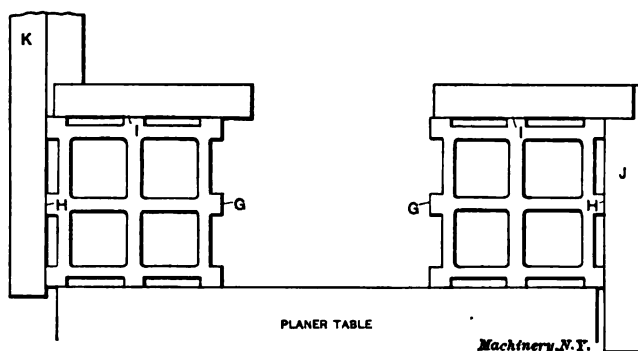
Method of Testing Accuracy of "Planing Square" when using the Side-heads
